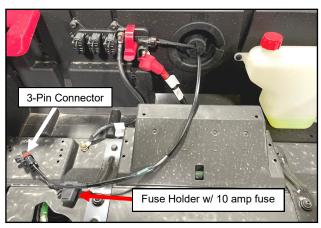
(Install Wiper Power Harness, Under Hood)
